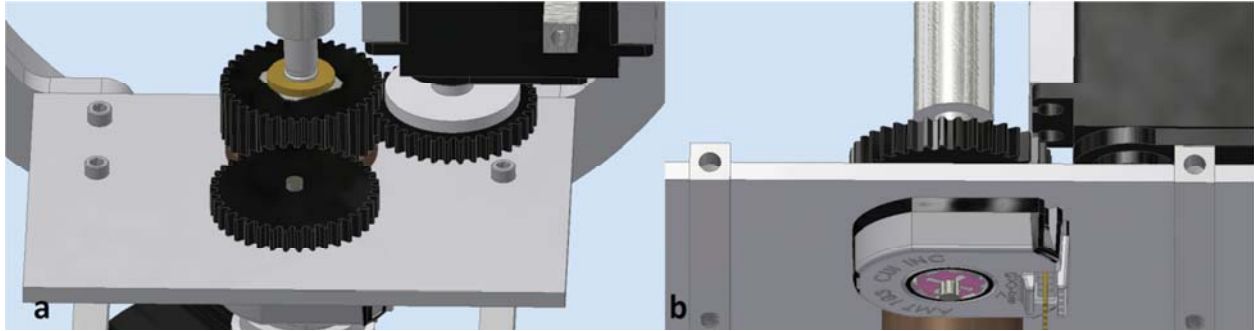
Servo External Encoder Feedback Concept. This concept allows the gear and shaft housing to turn continuously. (a) The gear in the foreground meshes with the large gear at the top of the shaft and gear housing transferring the motion to the encoder via a small shaft at its center. (b) The encoder mounted under the plate measures the angle and angular velocity of the shaft and provide positioning feedback to the servo.
